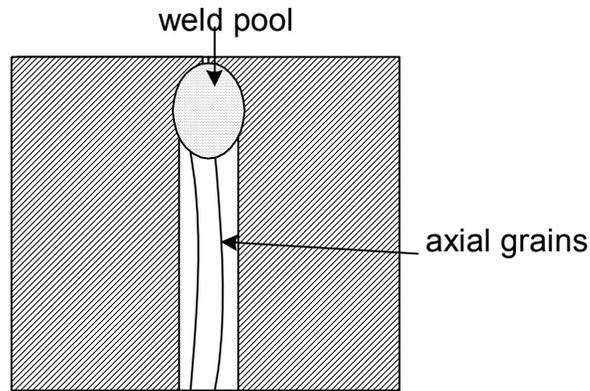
Schematic of axial grain in weld joints
